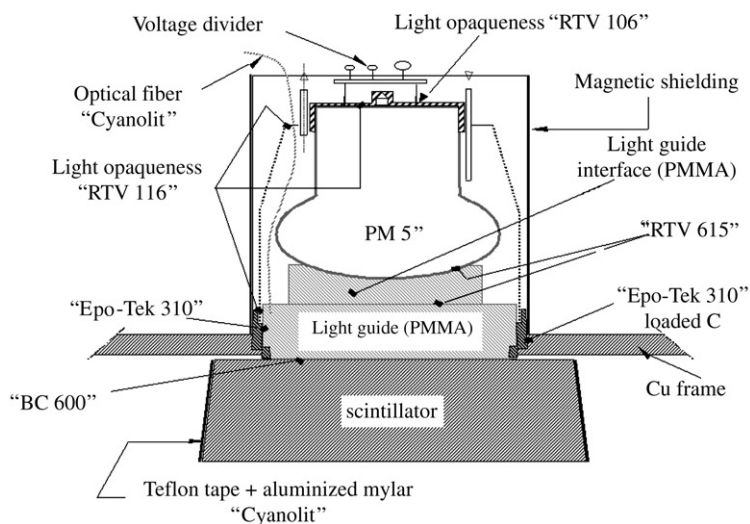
Schematic view of the mounting of a photomultiplier tube showing the location of the different adhesives used.
